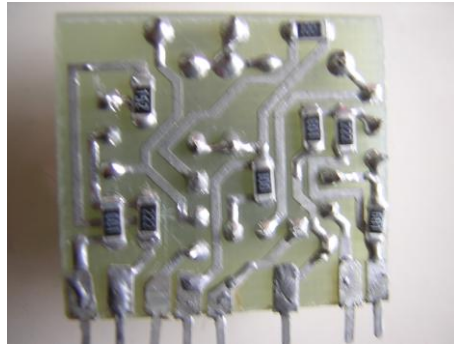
Surface mount devices in a printed circuit board of a nuclear preamplifier.
